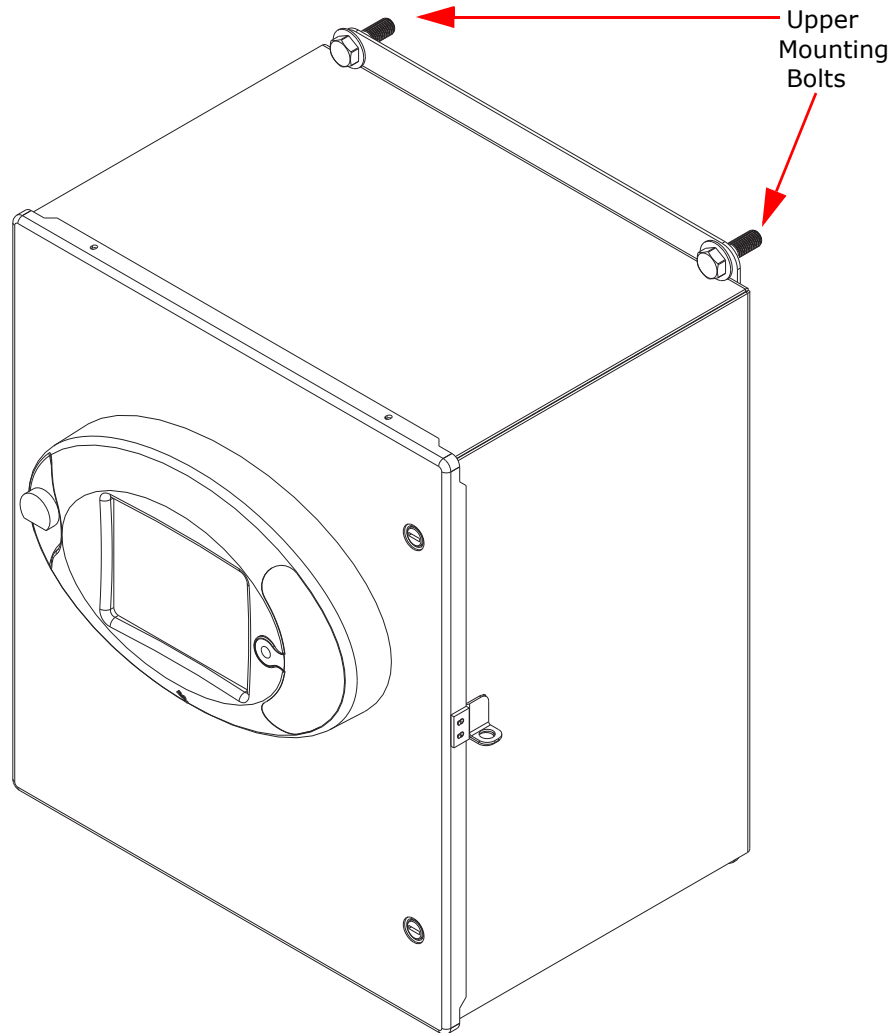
Mounting Bolt Installation, Upper Bolts
